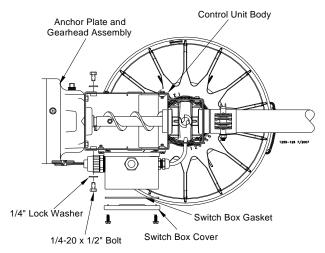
Attaching the Anchor Plate and Gearhead Assembly to the Control Unit Body
